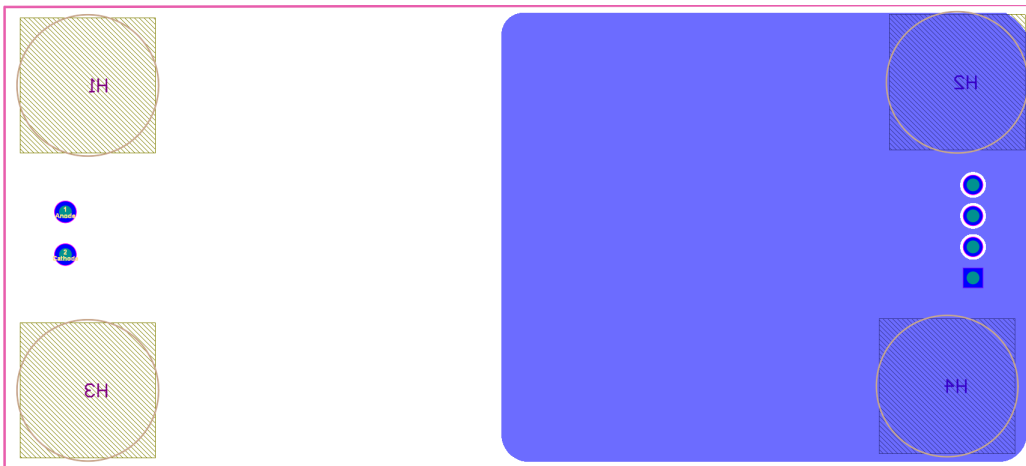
ISOM8110DFGEVM PCB Layout - Bottom
